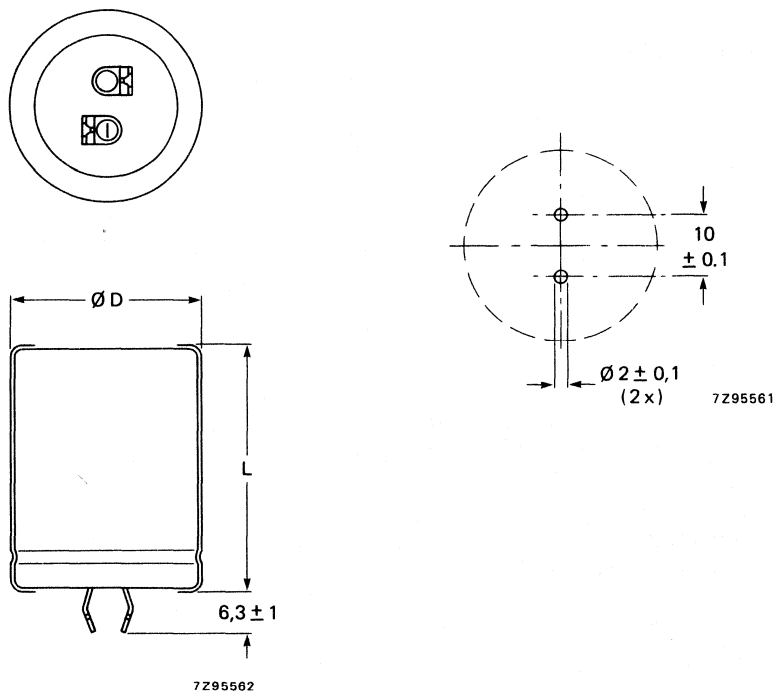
Capacitor outline; see Table 3 for dimensions $\varnothing D$ and L .
